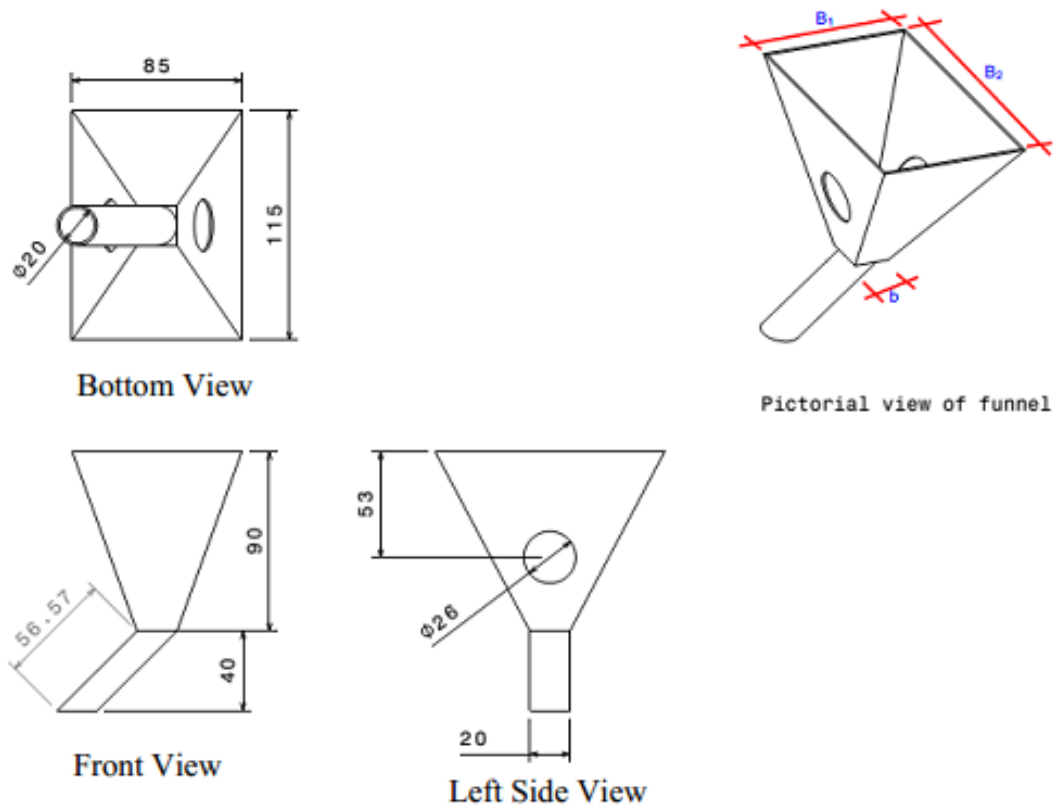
Funnel of the prototype planter (dimensions are in mm)
